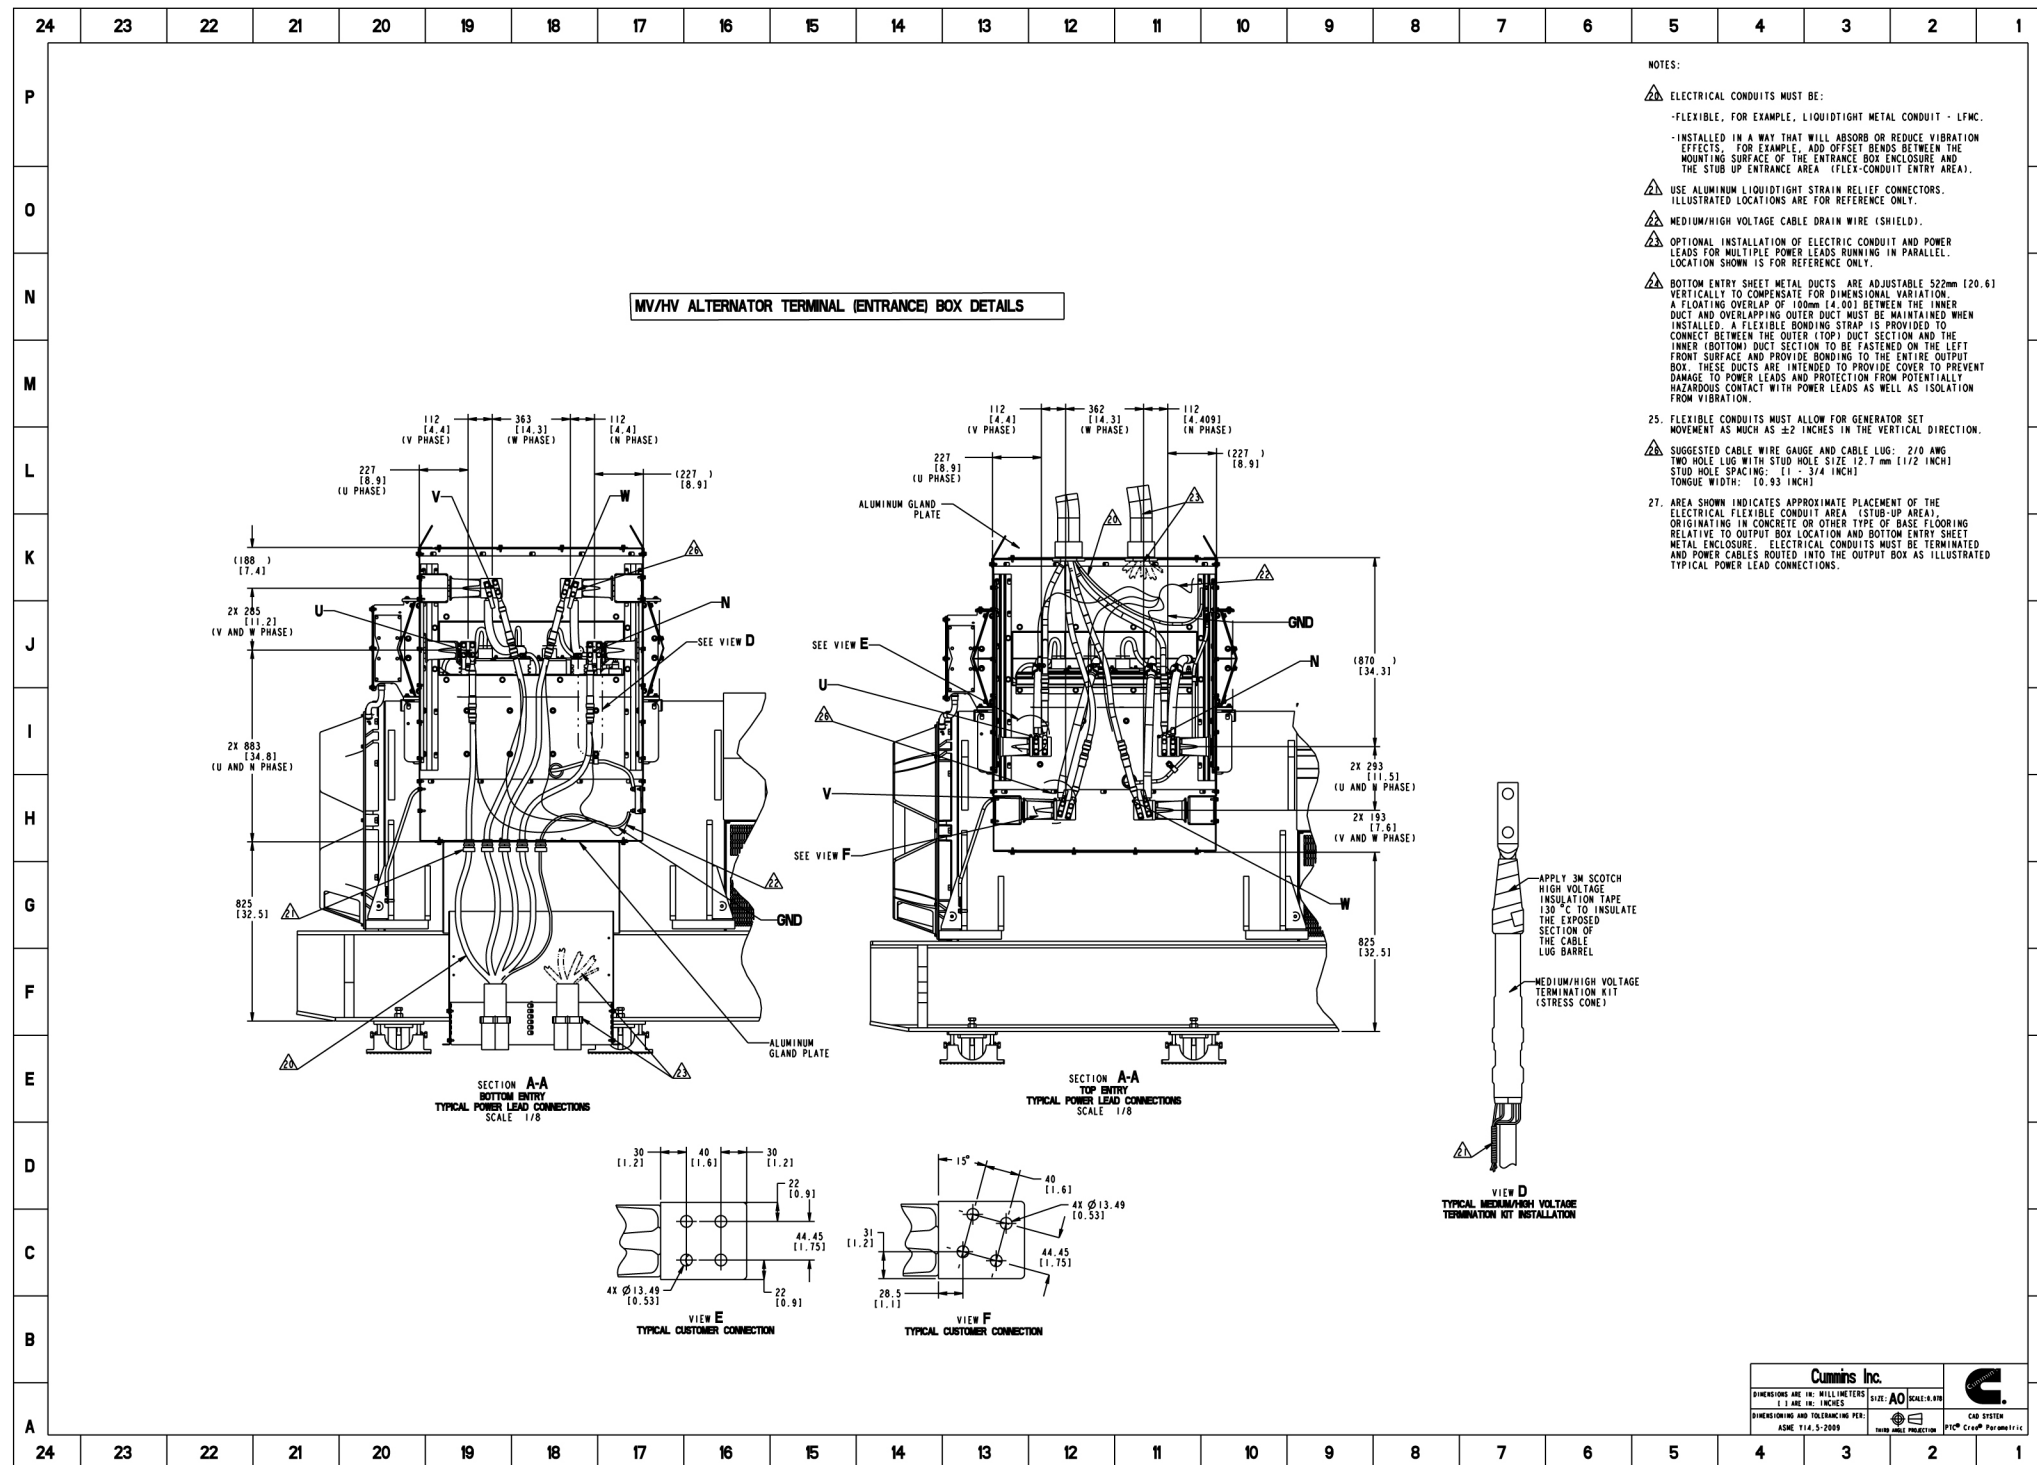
OUTLINE DRAWING (SHEET 8 OF 8)
